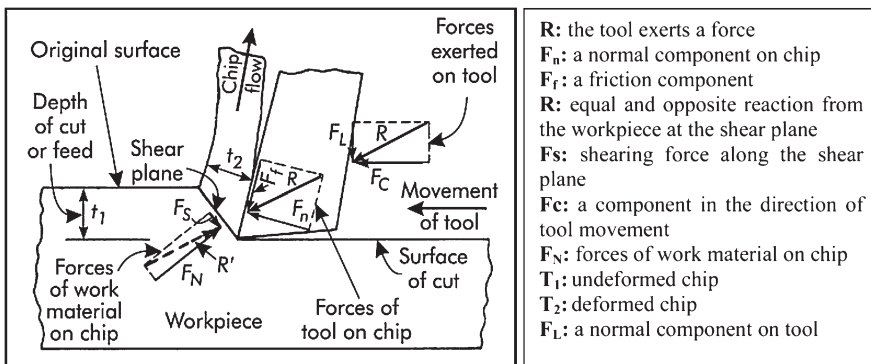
Forces exerted by cutting tool – orthogonal cutting (Schrader and Elshennawy 2000)
